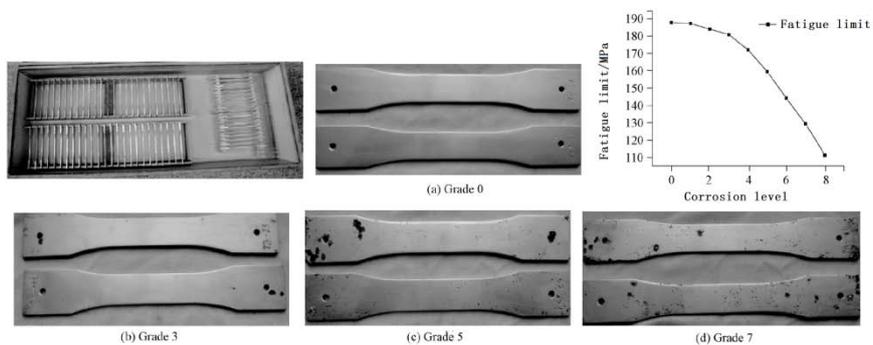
The corrosion surface of LD2 specimen at different corrosion levels.
